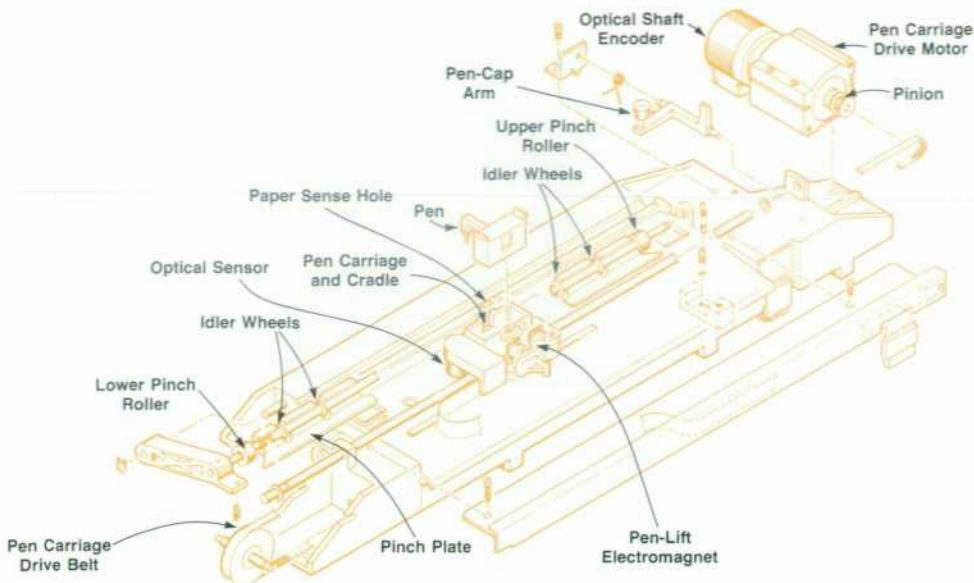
Pen drive mechanism. The pen is mounted in a carriage that is moved back and forth along the X-axis by a toothed belt driven by a digitally controlled dc motor.
